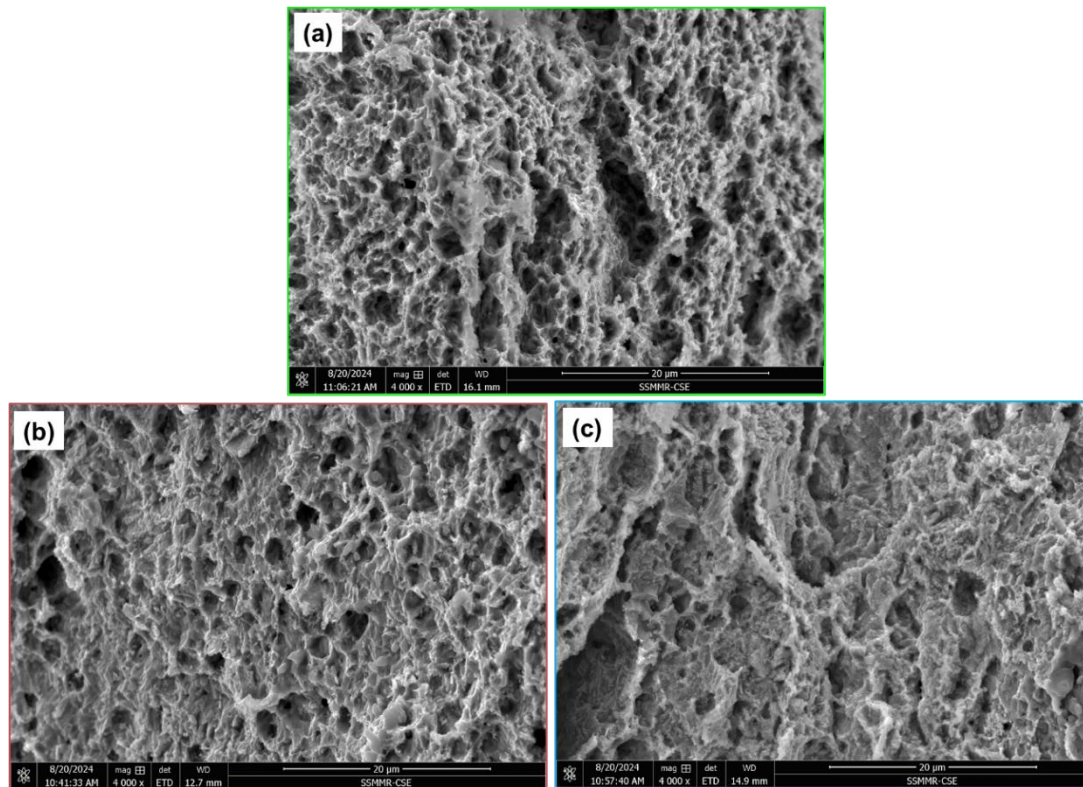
Fracture surface morphology of (a) base Hardox 450 steel plate, and welded joints using (b) SMAW and (c) FCAW processes.
